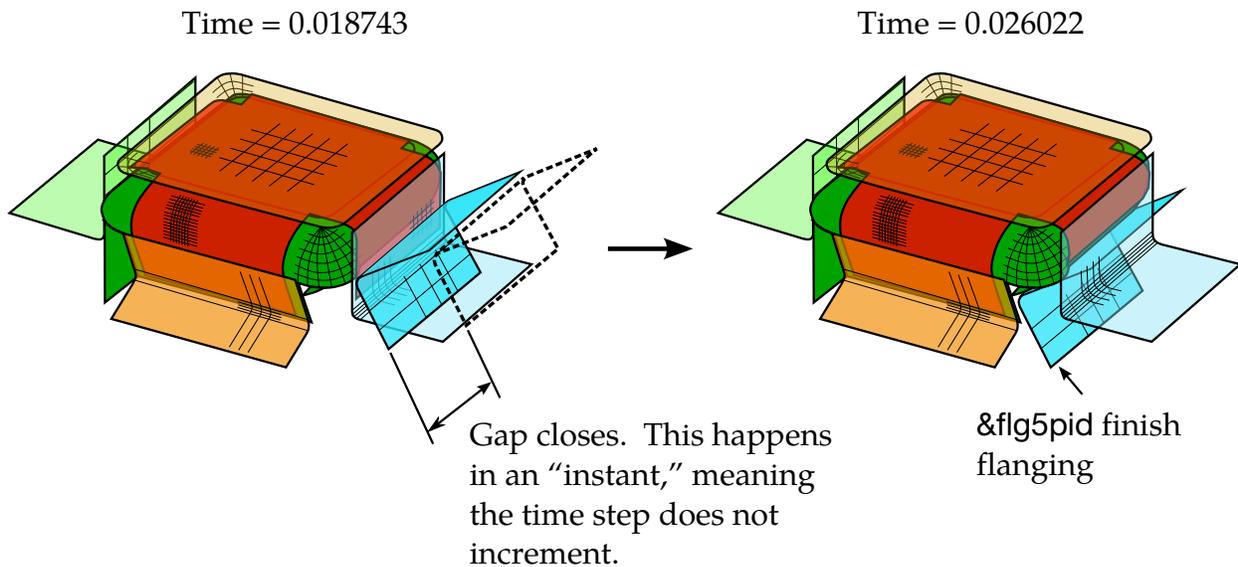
Closing the empty travel (left); flanging steel &flg5pid completes flanging process (right).
